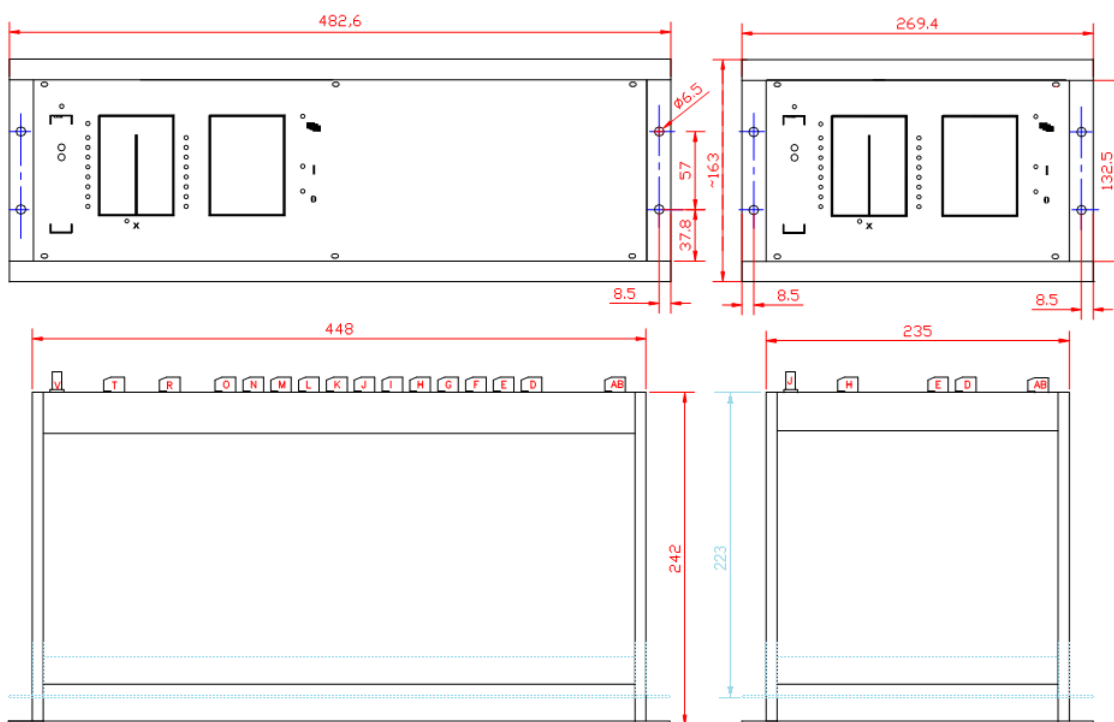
Dimensions for flush mounting of the previous 84HP and 42HP single rack, including the new (shorter) rack dimensions as well.
